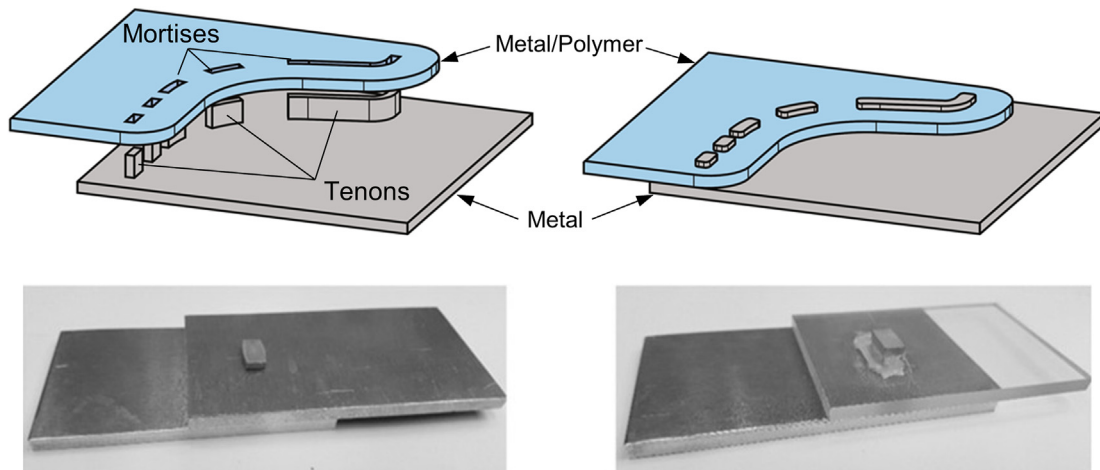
Schematic representation of the hybrid additive manufacturing process to produce mortise-and-tenon joints between sheets of similar and dissimilar materials partially placed over one another. The photographs show a monolithic aluminum joint (left) and an aluminum-polycarbonate joint (right) (adapted from Silva et al., 2019).
